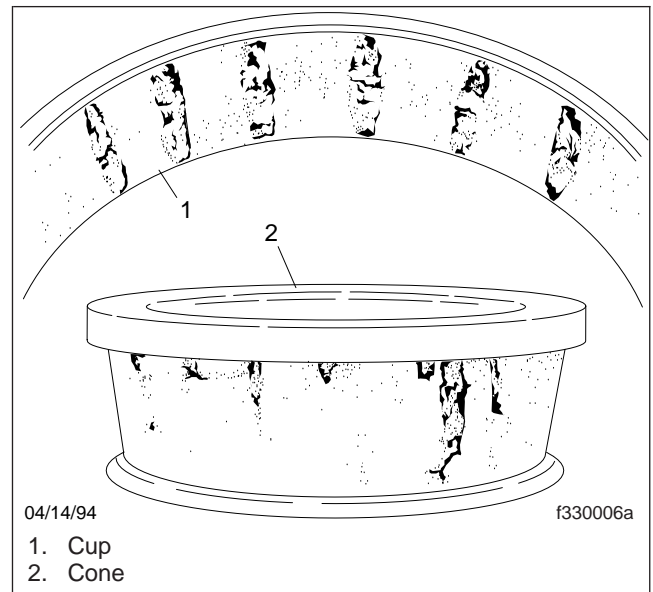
, Spalling (Flaking) of Wheel Bearing Assembly
